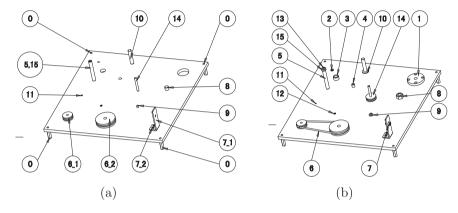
Task board. (a) Initial state and (b) Assembled state.
